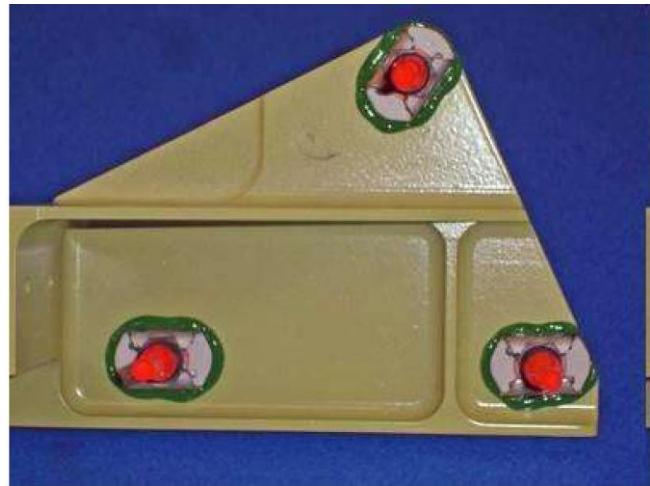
Nutplates bonded to an aluminum casting. Orange elastomer tabs passing through threaded fastener are for fixturing during adhesive cure and are removed prior to use.
